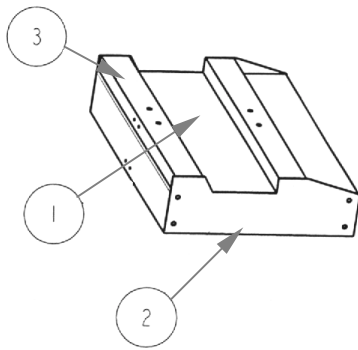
The final design of the front module. 1; bottom plate, 2; side plate, 3; channel cross-section beam.
